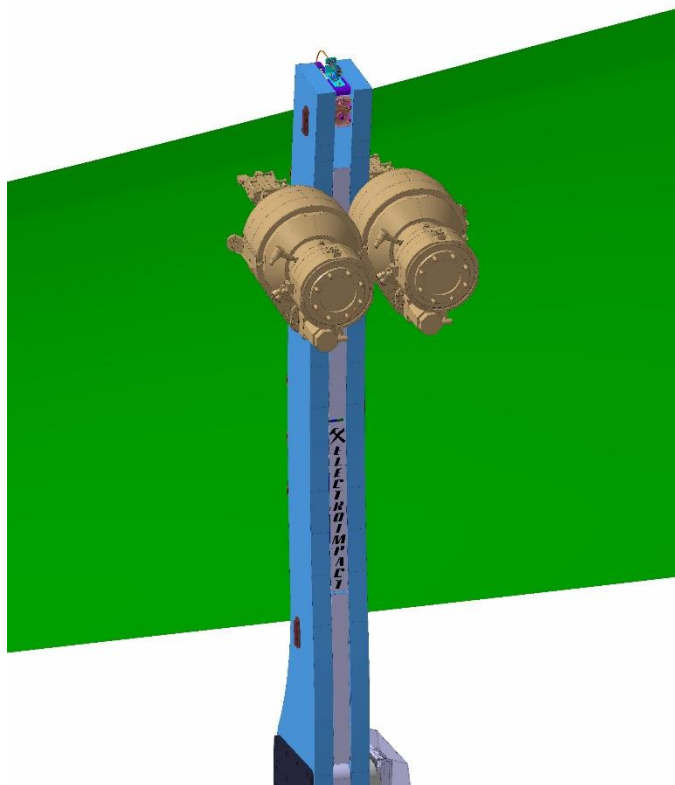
Skinny fixture post shown with representative panel and Stringer side machine head overlapping post on inboard and outboard side.
